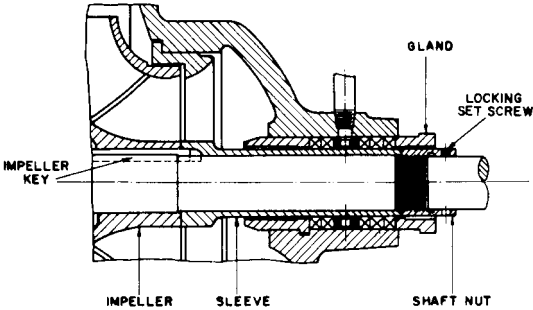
A sleeve with external locknut and impeller key extending into the sleeve to prevent rotation
